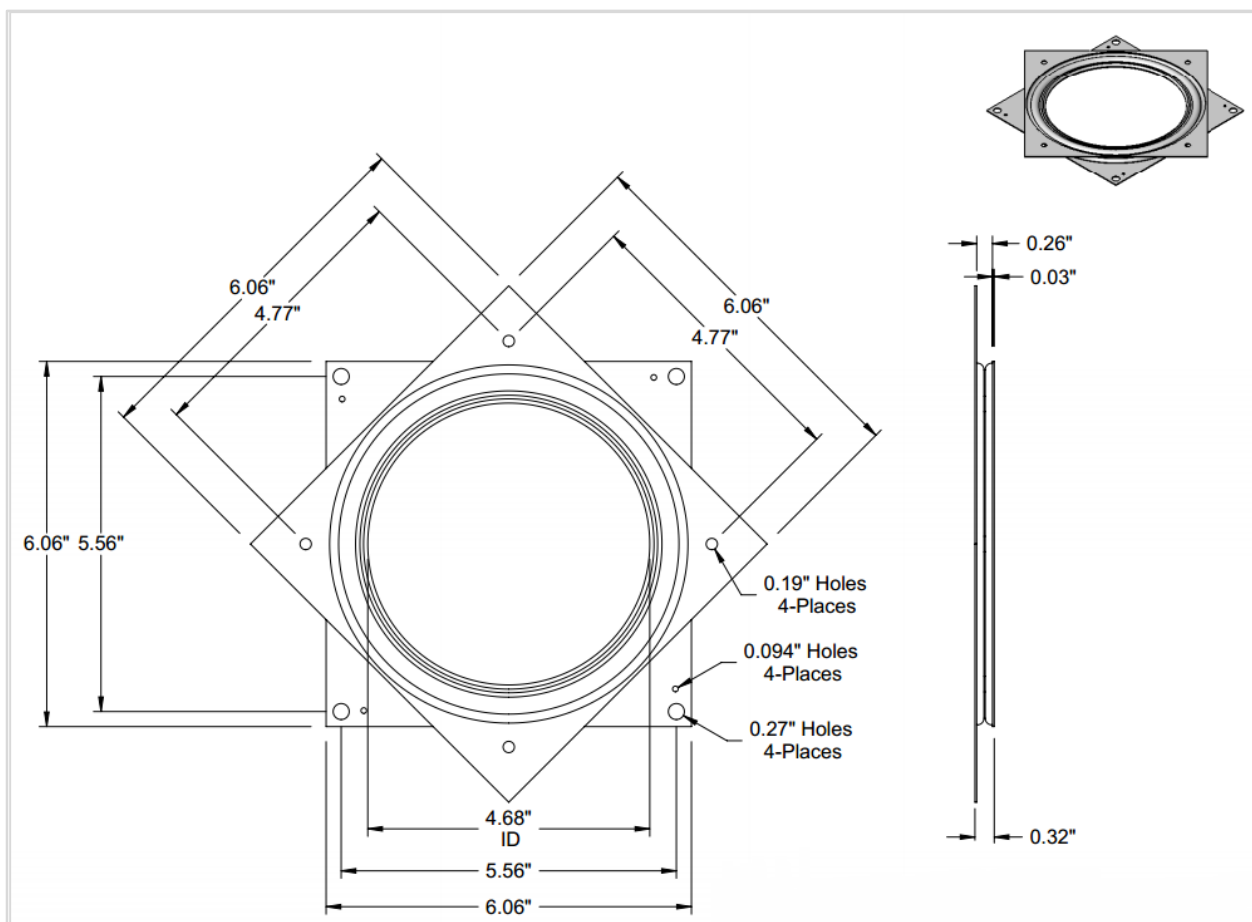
Aluminum rotational bearing detail, all dimensions in inches. [8]
